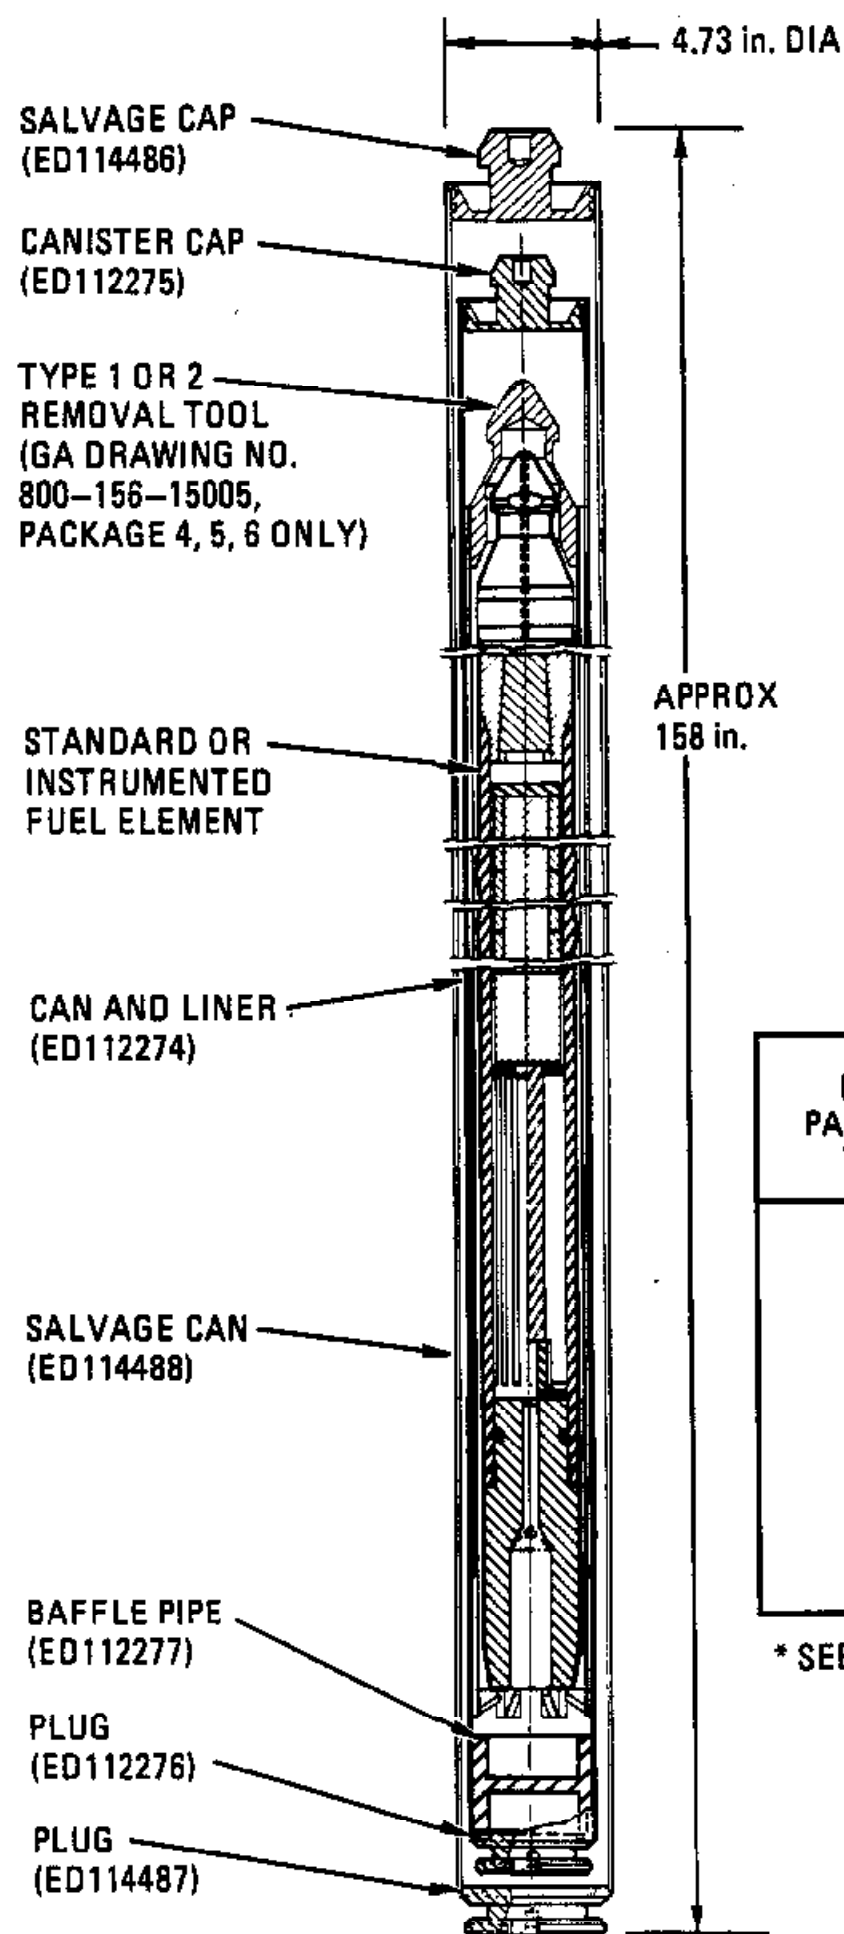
Core 1 fuel element in storage canister with removal tool
